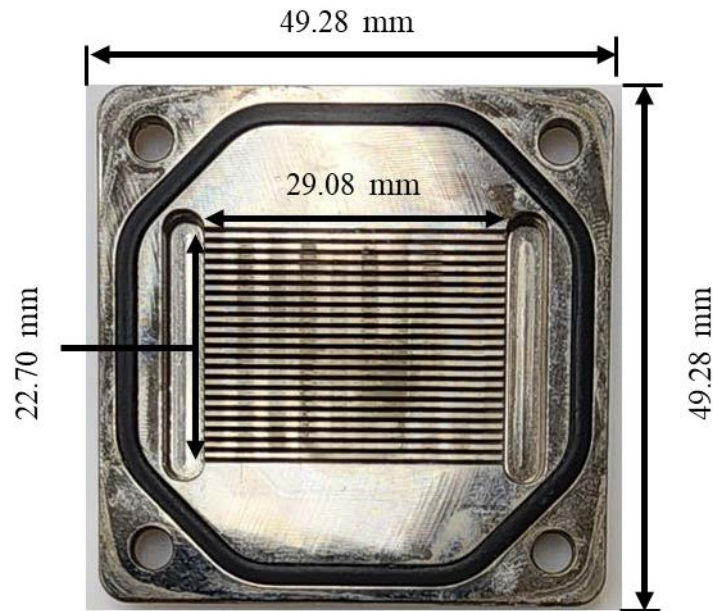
Heat sink from manufacturer Bywski with dimensions.
